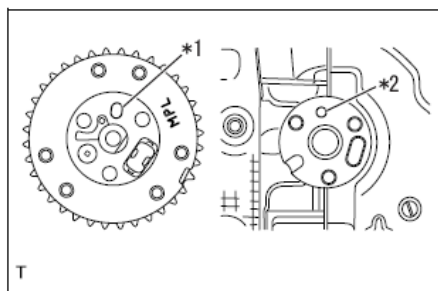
Securing Camshaft Timing Exhaust Gear Assembly Using SST
